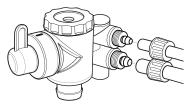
Placing Fitting Nuts Over Tube Ends
